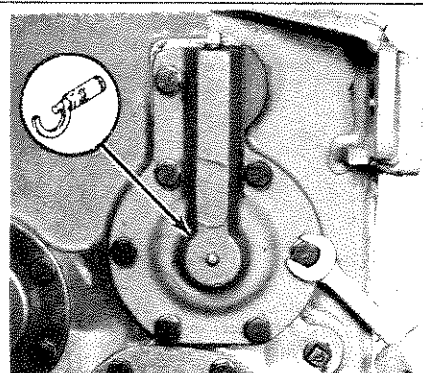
Bevel Gear Shaft, Location Of Components (Direct Drive And Power Controlled Winch)
